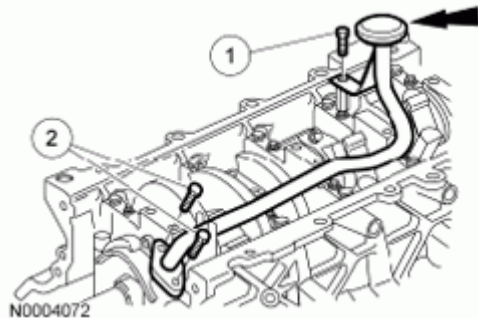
Identifying Oil Pump Screen And Pickup Tube-To-Oil Pump Bolts
